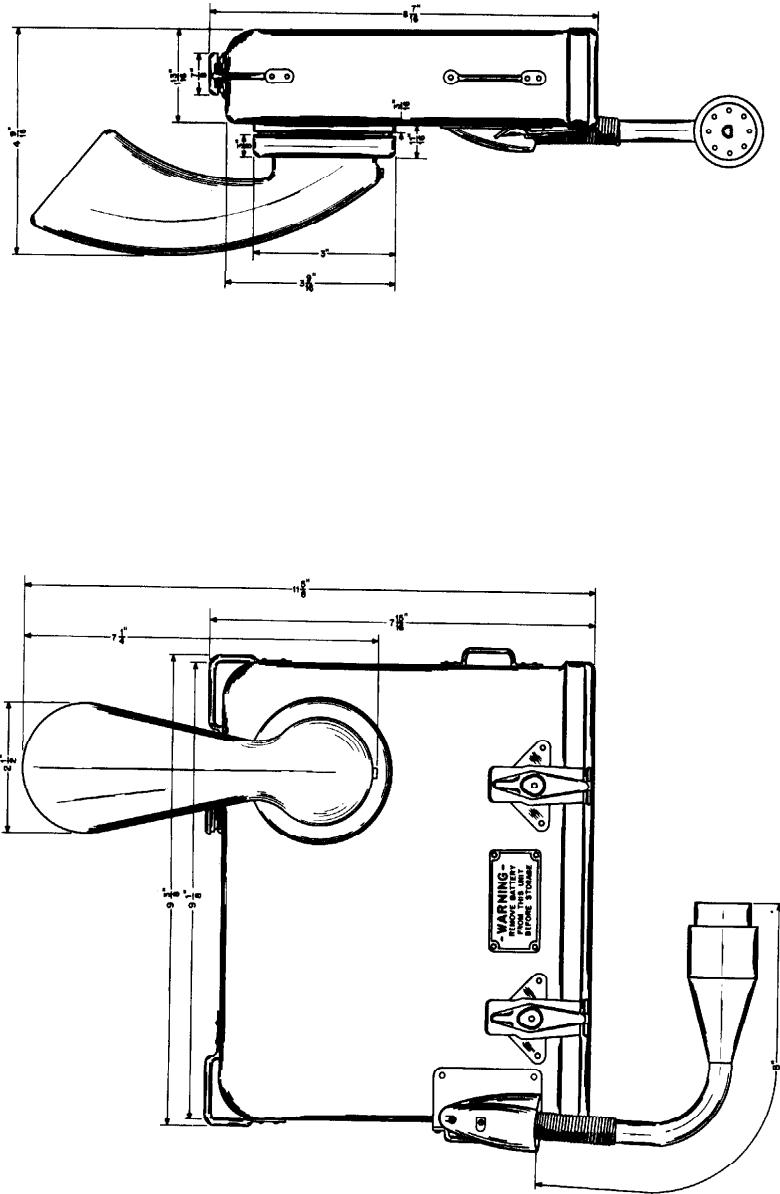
Chest Unit T-39-(\*), Outline Dimensional Detail
